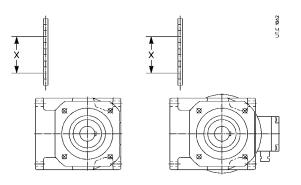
Position the gear reducer or gearmotor, mounting position B6 for the measurement of oil level (quantity).
